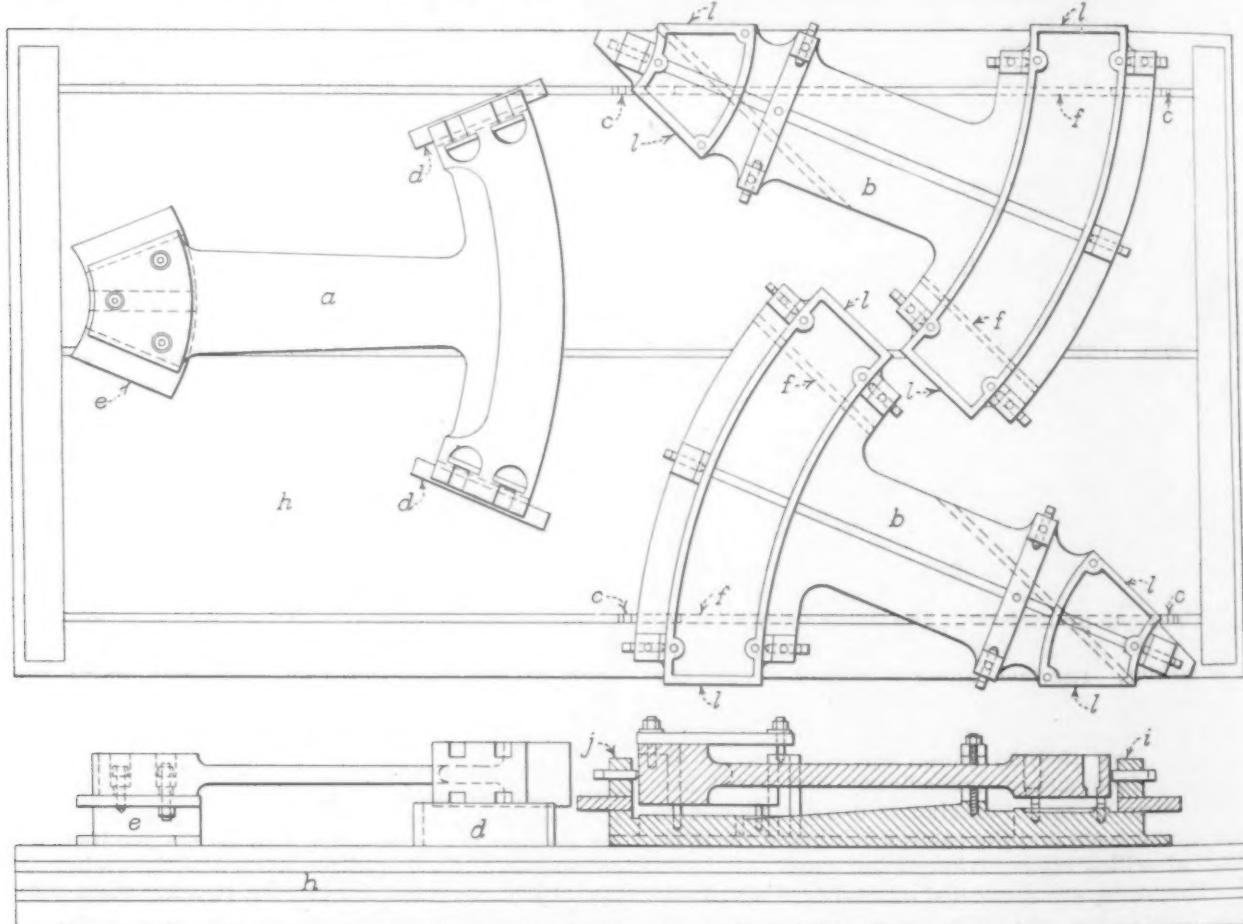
The Segments of the Wheel Mounted on the Planing Machine
